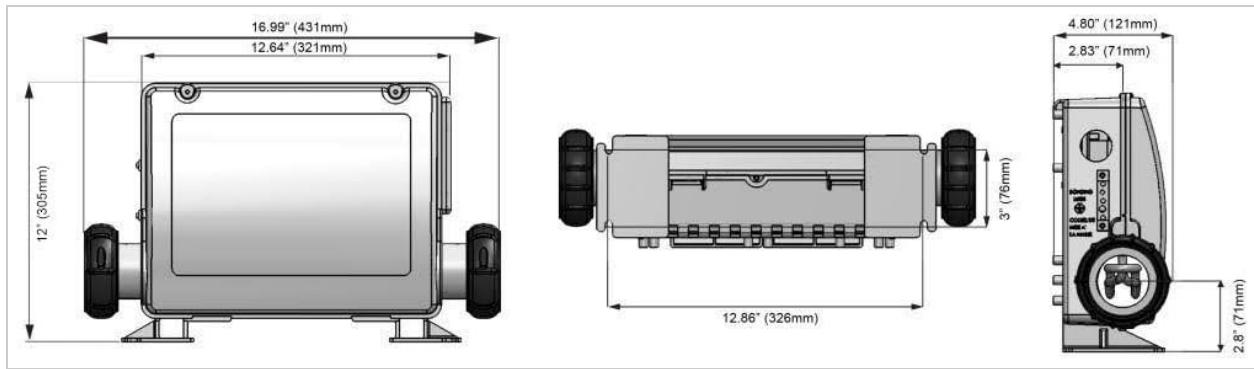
Dimensional drawing of the Balboa BP2000 Spa Heater Pack, including length, width, and height measurements.
